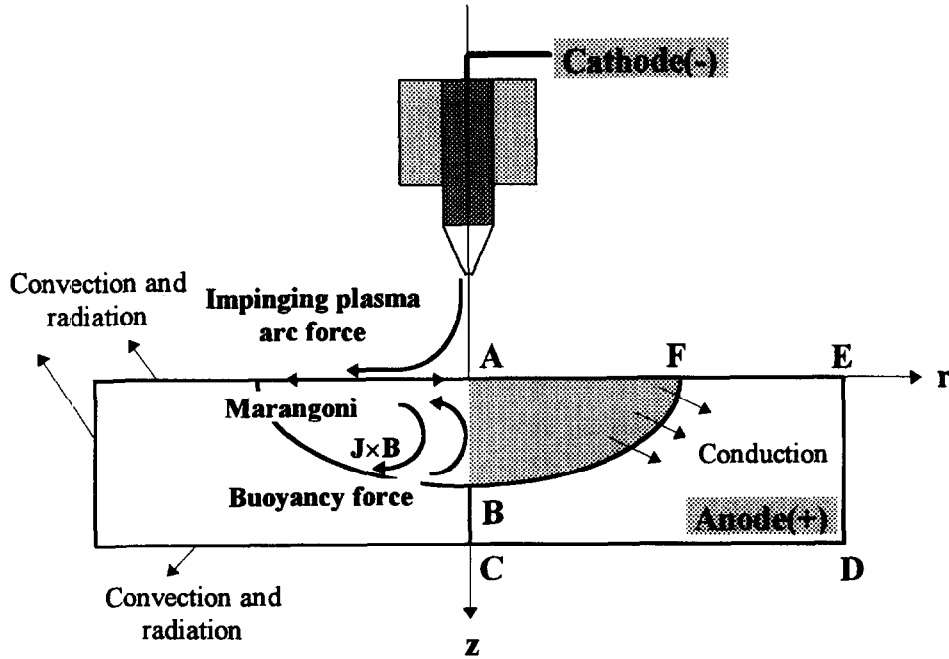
Schematic representation of GTA welding pool with driving forces.
